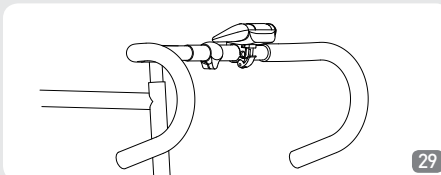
shows the correct position of the console mounted to the handlebar. Check the console is securely fixed to the handlebar and slightly inclined before starting.
